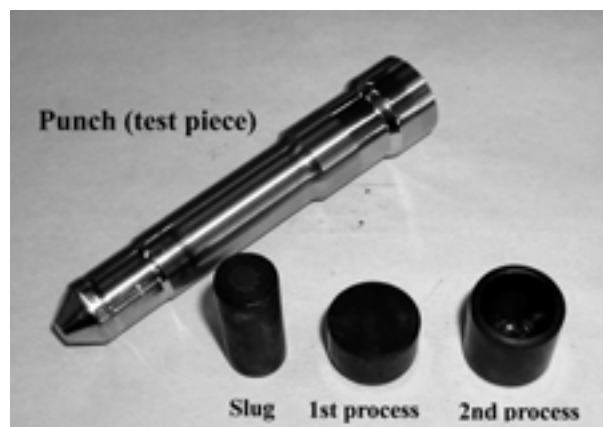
Shape of the test piece punch and work pieces of the Punch Damage Test.
